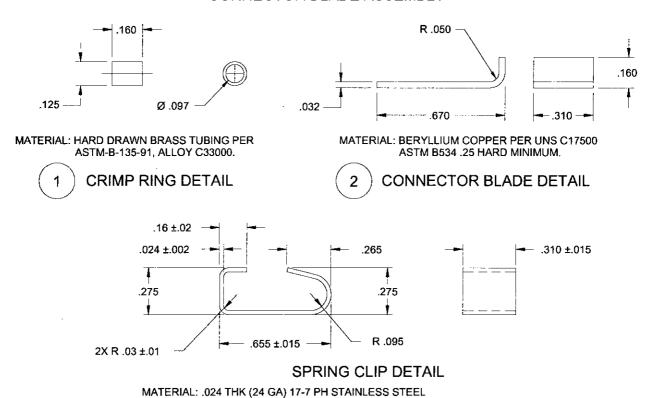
PAR-56 Lampholder, Lamp Connector Detail (Sht 5 of 5)
